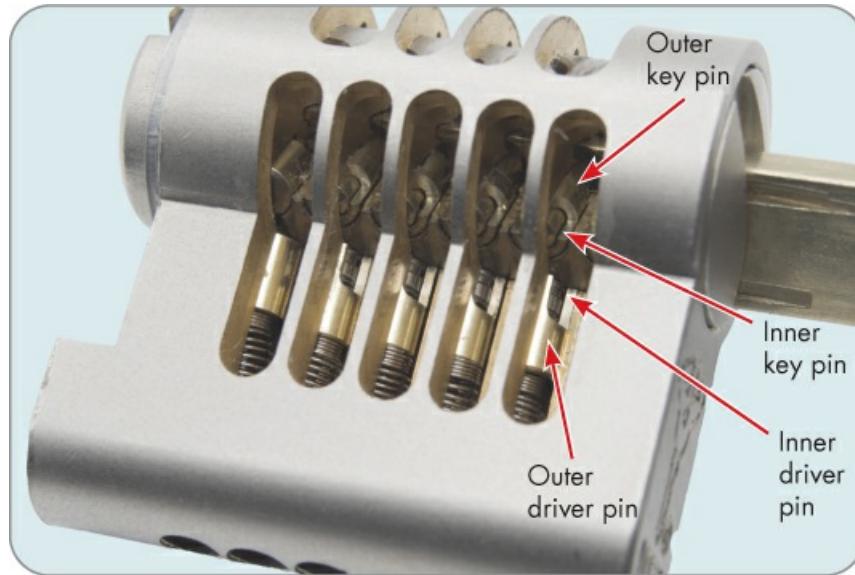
A Mul-T-Lock cutaway showing pin-in-pins
